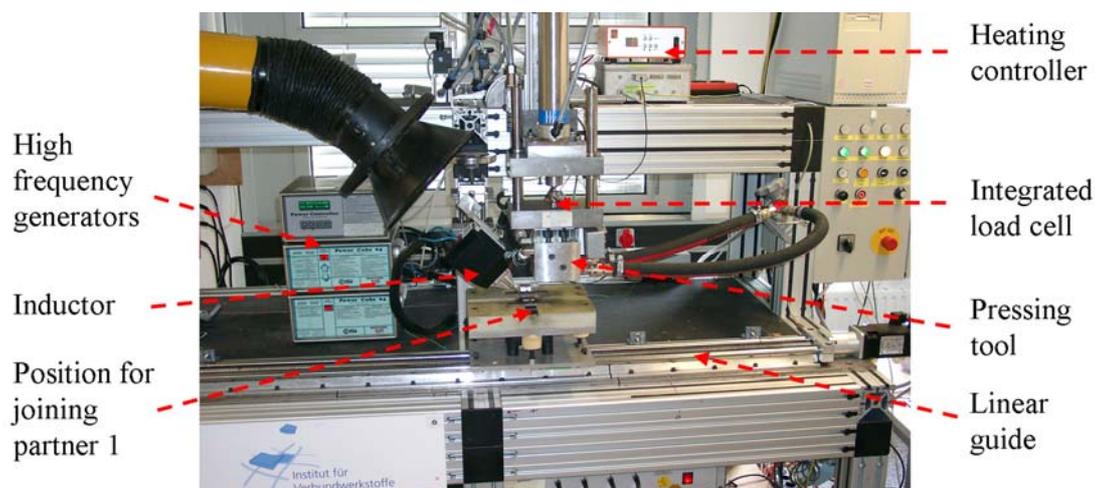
Overview of the equipment for discontinuous induction welding
